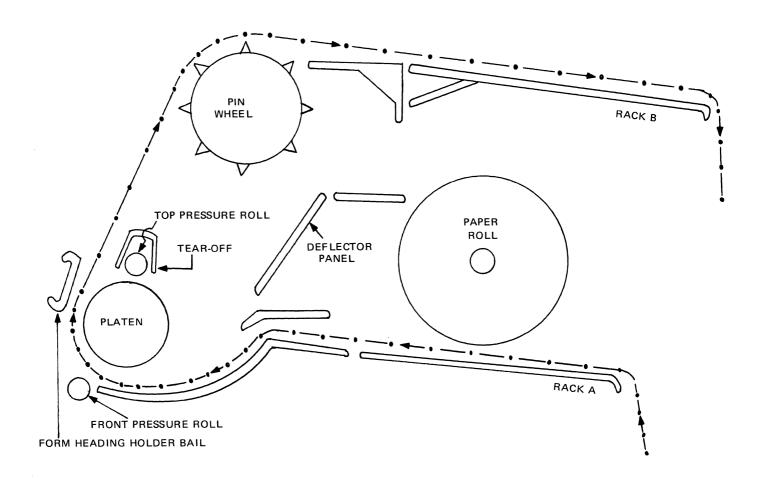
Pin Feed Path, Style 1 Intake and Exit Racks, Rear Feed Forms Handler
